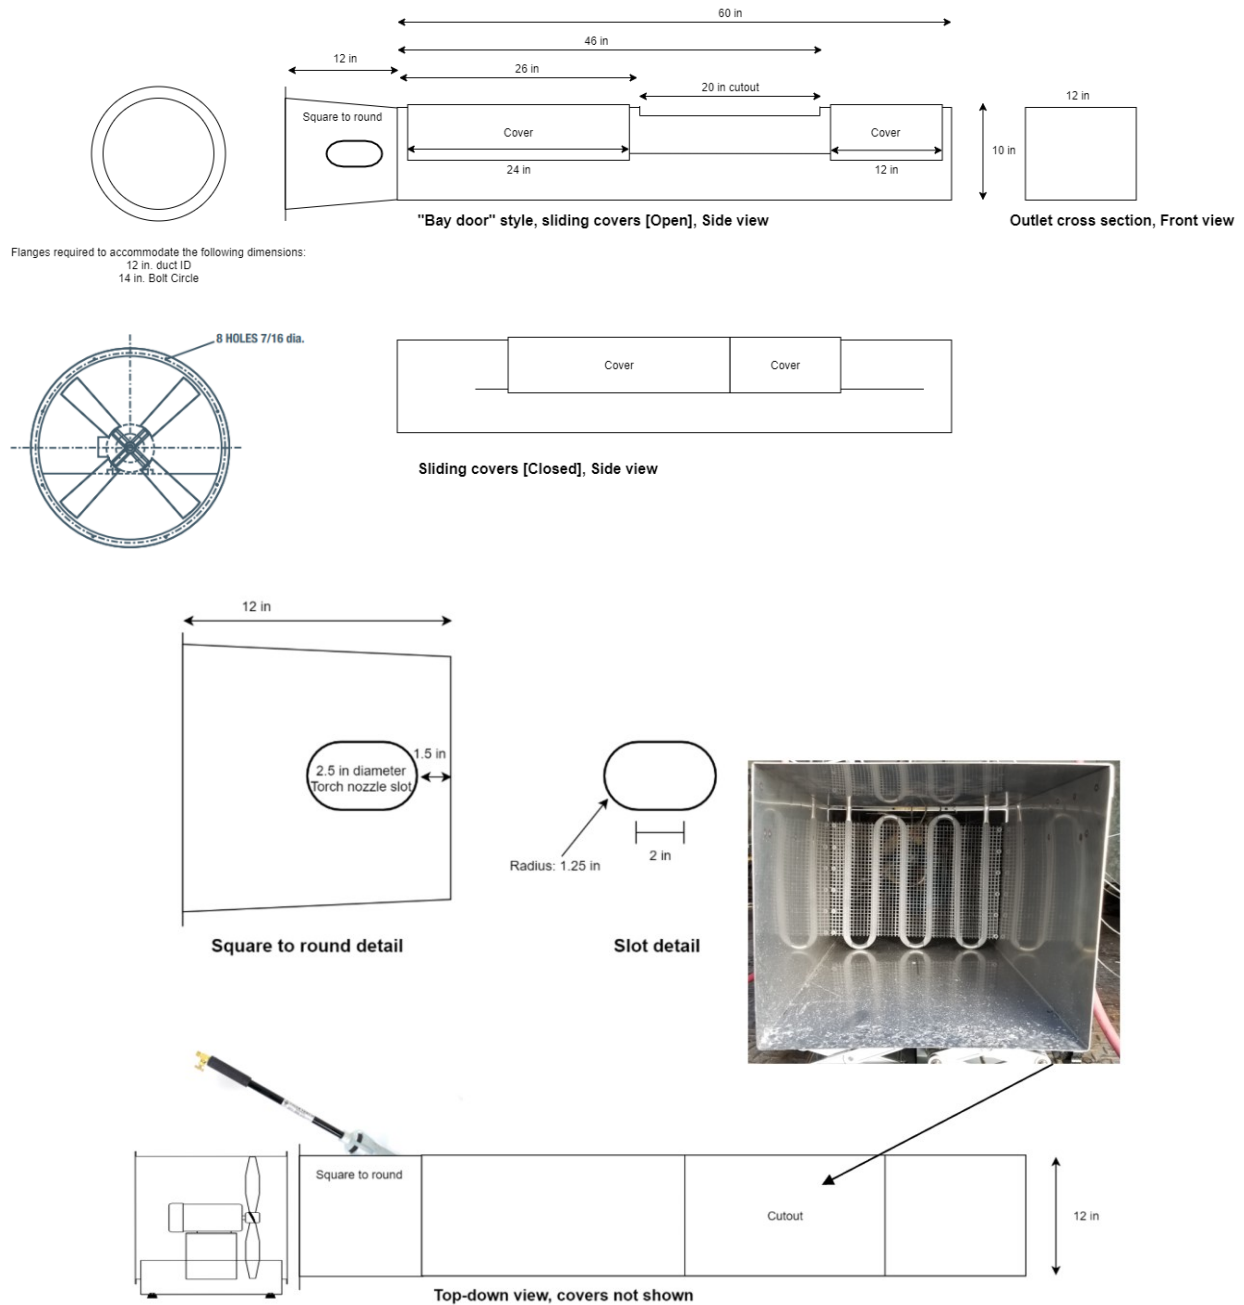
Duct drawing and detailed views of slot, sample fitment, and torch insertion
